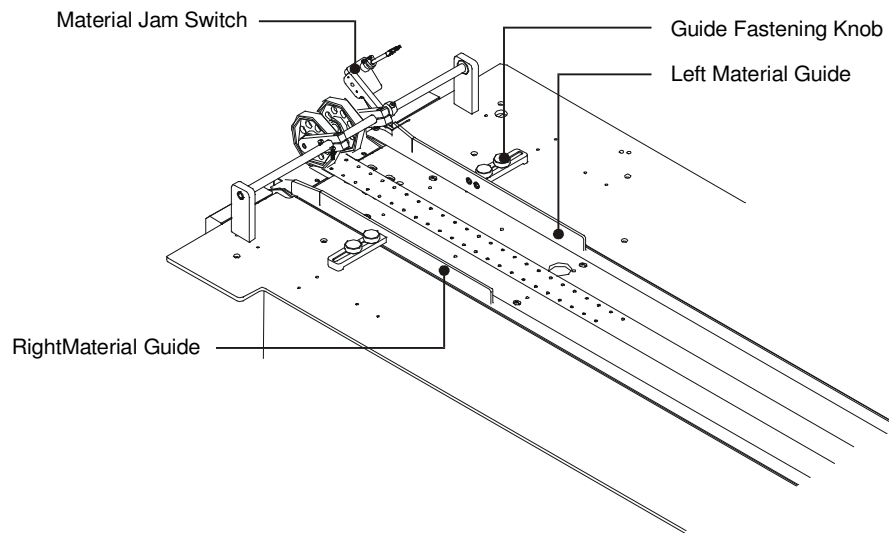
Outfeed section of the feed rollers illustrating the material side guides.
